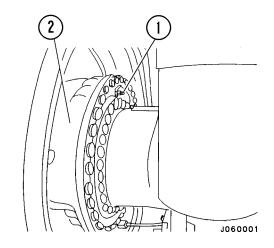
REAR BRAKE WEAR 1. Air Bleed Plug 2. Brake Housing
